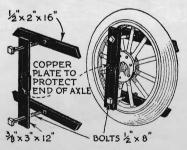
Wheel puller made of iron bars, a piece of copper plate and two heavy bolts
